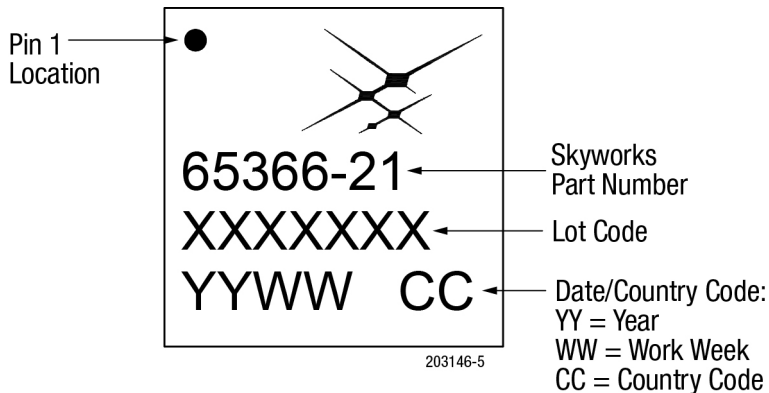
SKY65366-21 Typical Part Marking (Top View)
